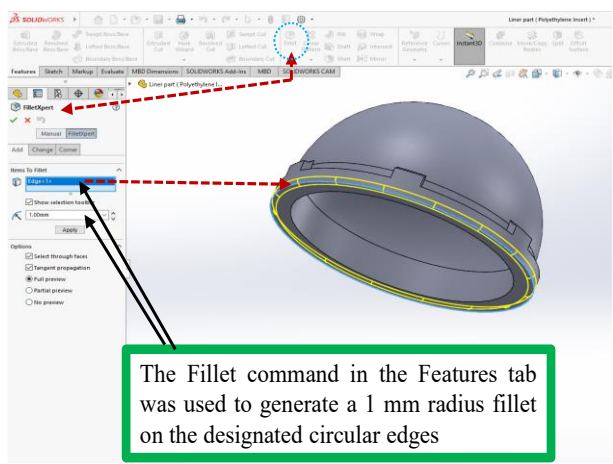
Applying a 1 mm-radius fillet to the lower outer edge of the liner component
